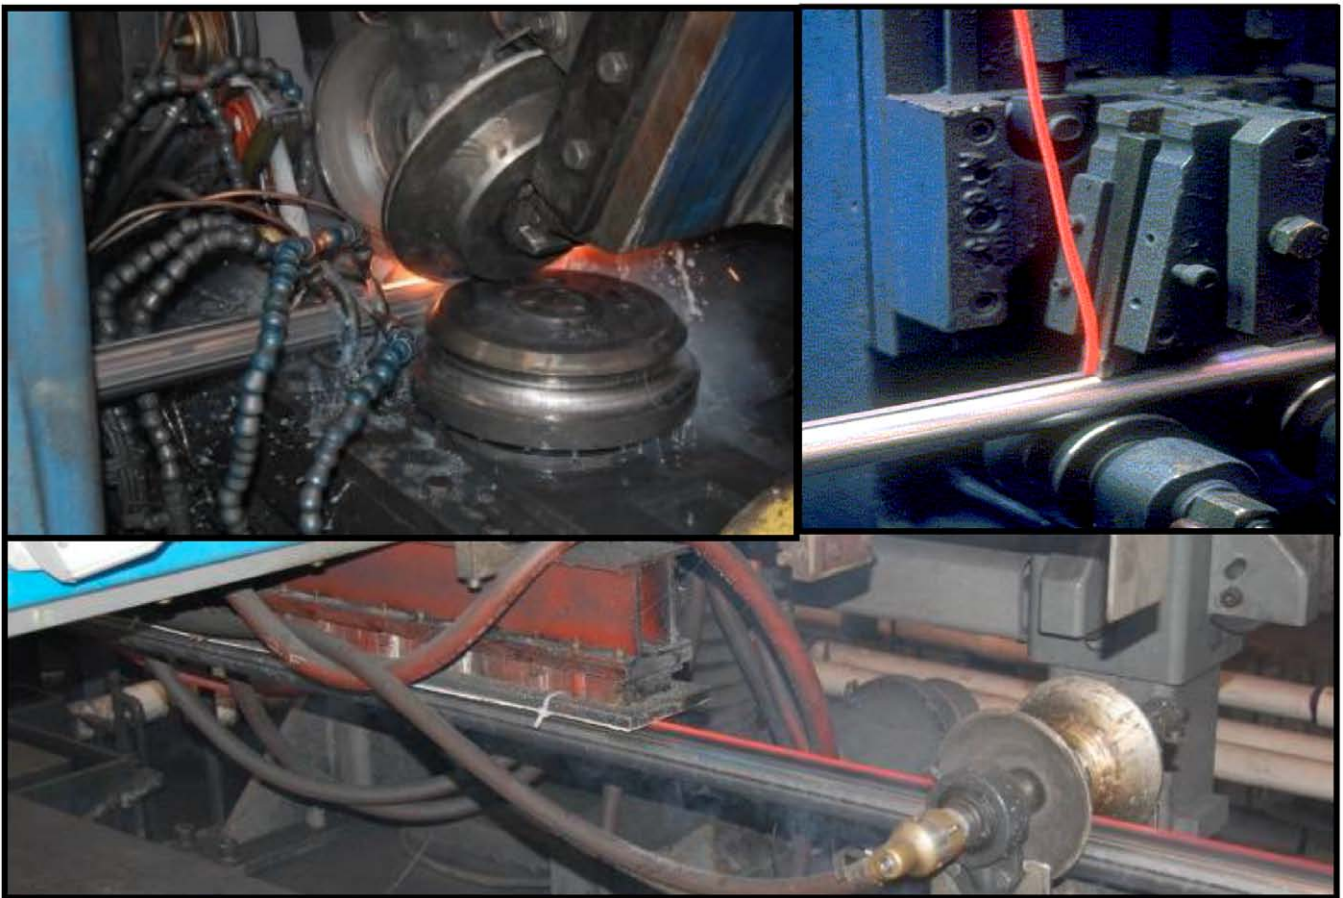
CT Seam Weld, Removal and Annealing
